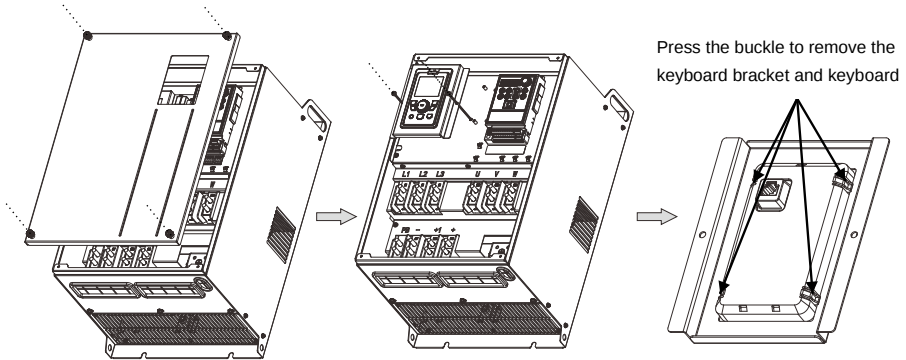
Steps for Removing the Dual Display External Keyboard
